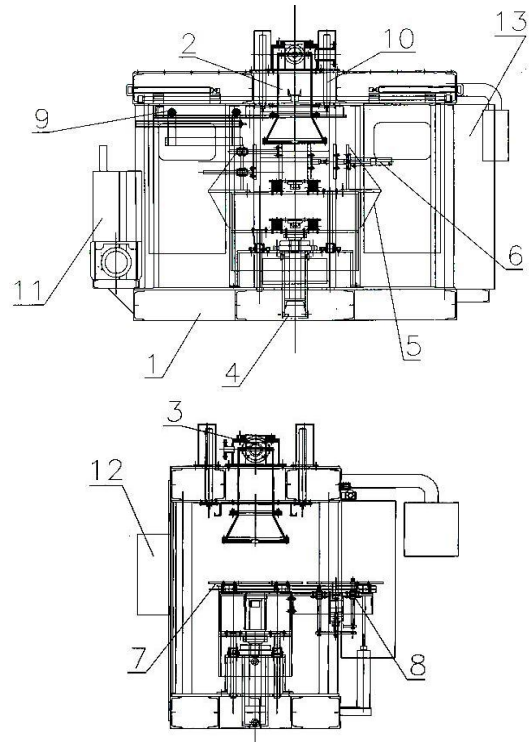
Schematic diagram of a shooting machine: 1 – machine frame, 2 – shooting head, 3 – shoot valve, 4 – table-lifting cylinder, 5-core box table, 6 – core box opening, closing and clamping assembly, 7 – core removal mechanism, 8 – core push assembly, 9 – gas hood with ejection plate, 10 – clamping of horizontally split core box; 11 – hydraulic-pneumatic installation, 12 – hydraulic system, 13 – electric-powered supply and control system
